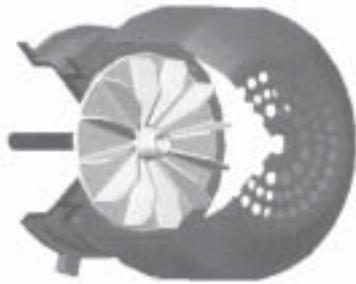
3D view of the injected part "Ventilator" assembled on the axle of an electrical engine
